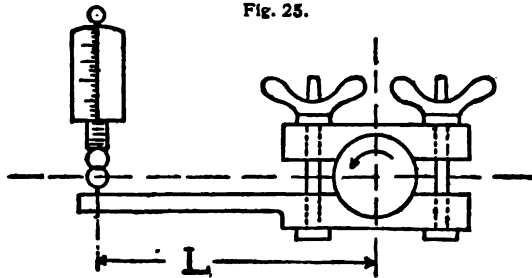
illustrates a simple form of this brake, applicable to the testing of small motors. The brake is made of two wooden pieces held together by bolts with wing nuts, by means of which the pressure on the surface of the pulley can be adjusted, thus
